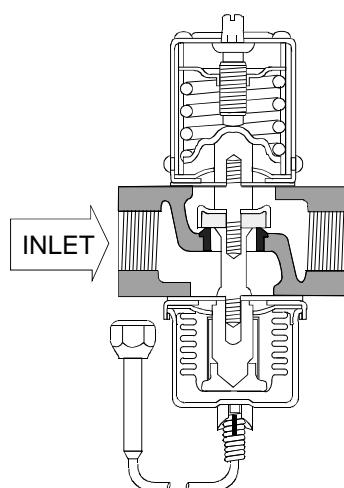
Threaded Type Direct-Acting Valve Cross Section
